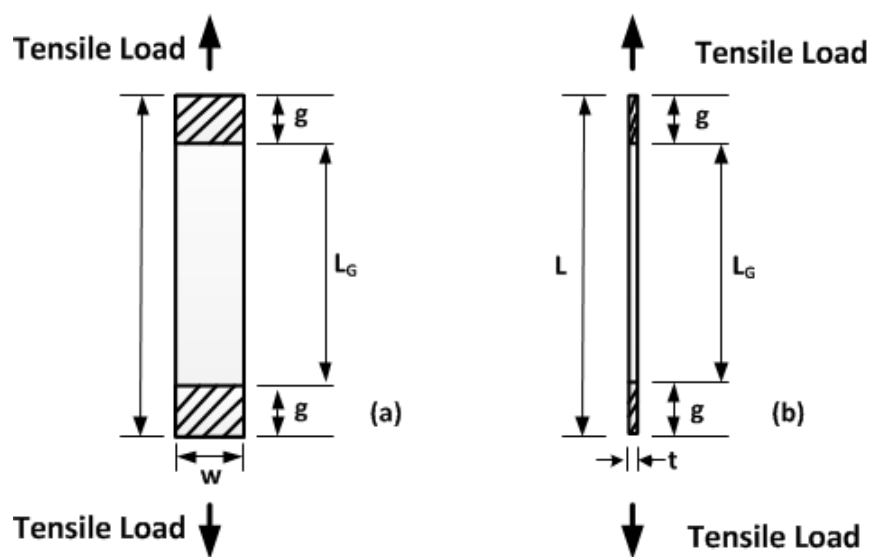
Sketches of a uniaxial tensile test specimen (a) Front-view (b) Side-view
